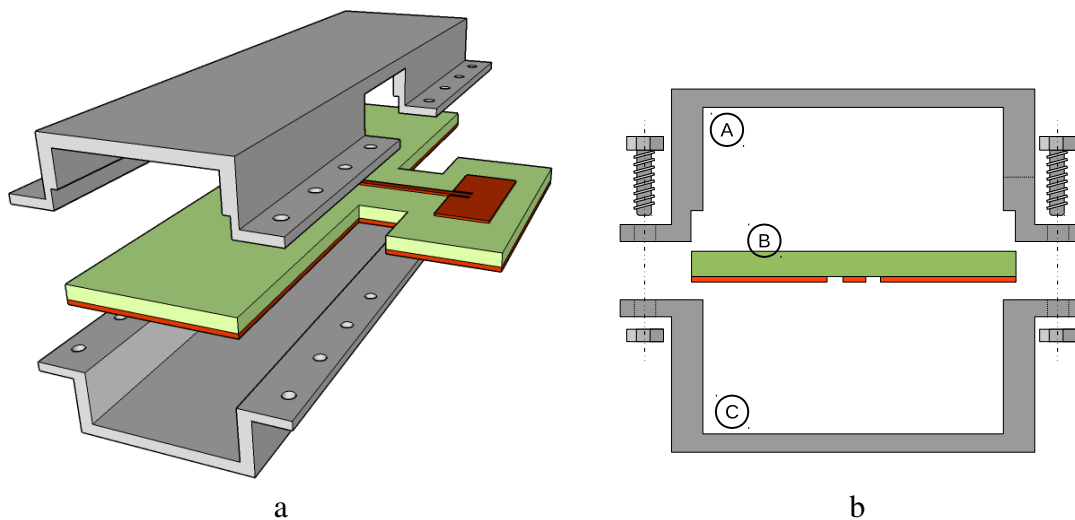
Rigid shielding. The shielded line can be built in three pieces.
